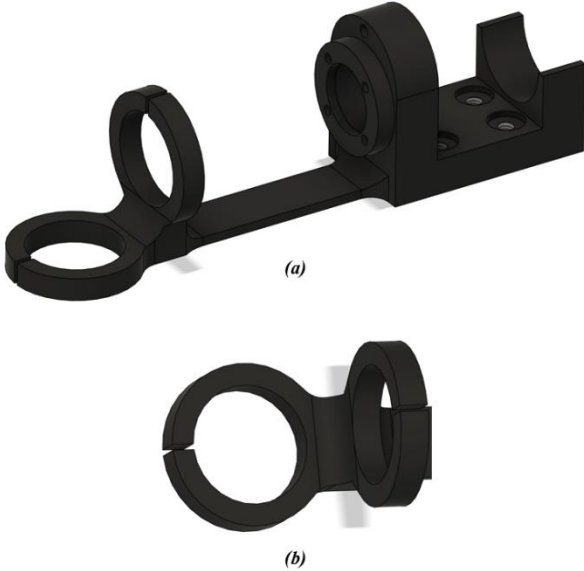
(a) Motor bracket with brace. (b) Brace with sections removed for gear placement.
